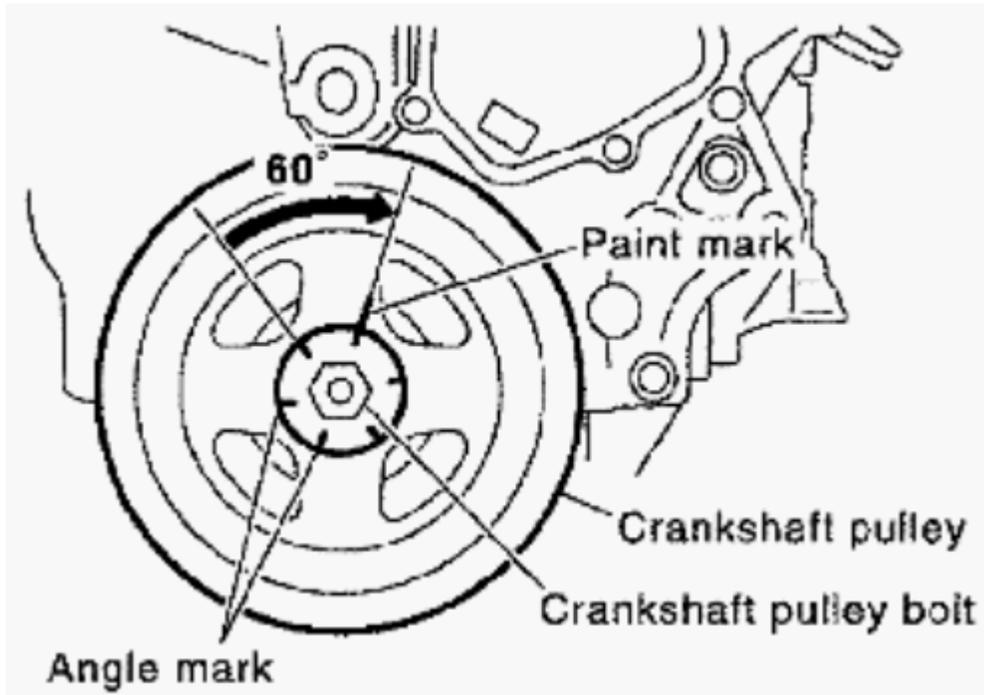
Identifying Paint Mark On Crankshaft Pulley
